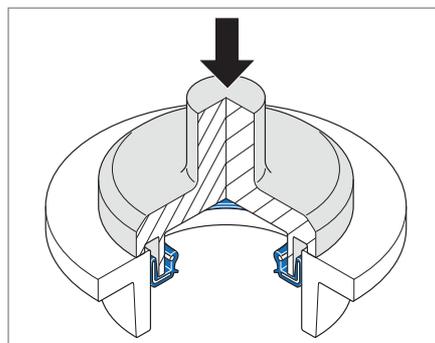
Installation from the back side. Outside diameter of the pilot shaft approx. 0,5 mm (0.02 in) smaller than the inner lining diameter of the seal. Please inquire if necessary.
